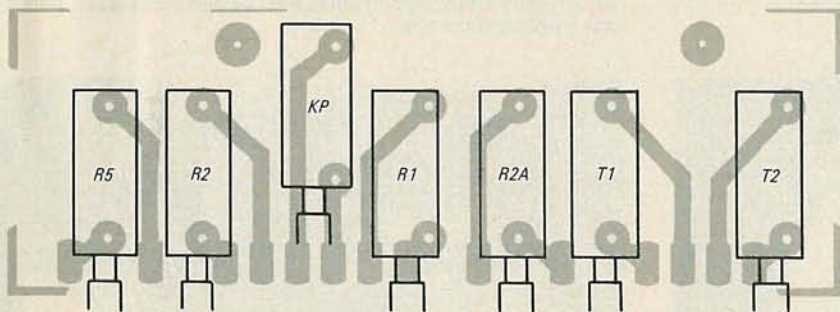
PARTS-PLACEMENT diagram for the CODE board.
